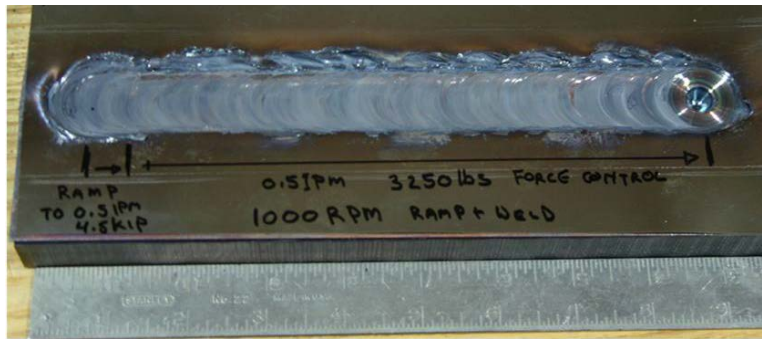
Image of a 7.5-in. weld translation of cast iron.
